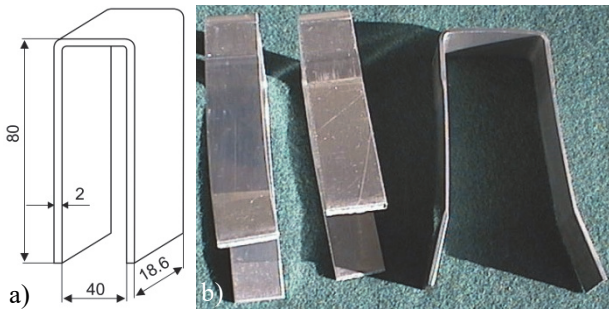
Specimen dimensions (a) and strips after ironing (b)
